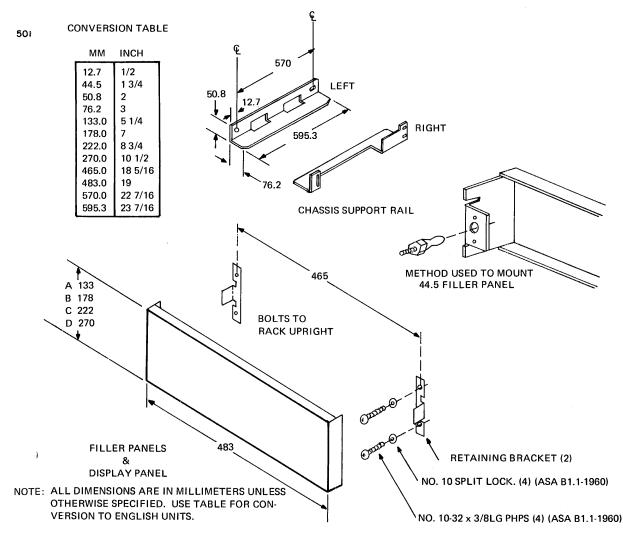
Typical Mounting Configuration for Display and Filler Panels
